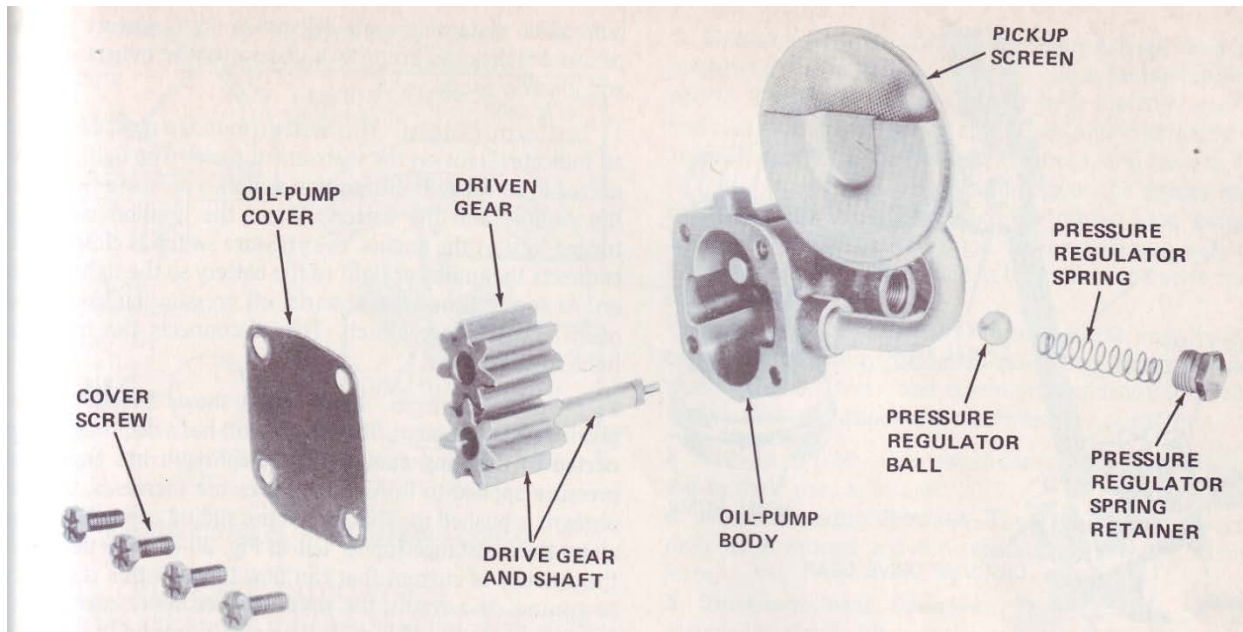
Disassembled gear-type oil pump. (Pontiac Motor Division of General Motors Corporation)
